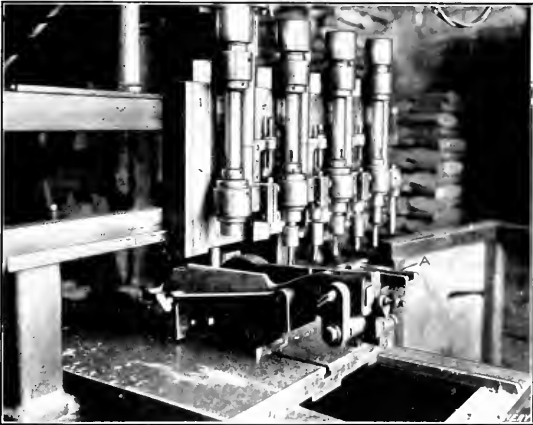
Profiling Machine for cutting out Forward End of Stock to fit Receiver Tangs
